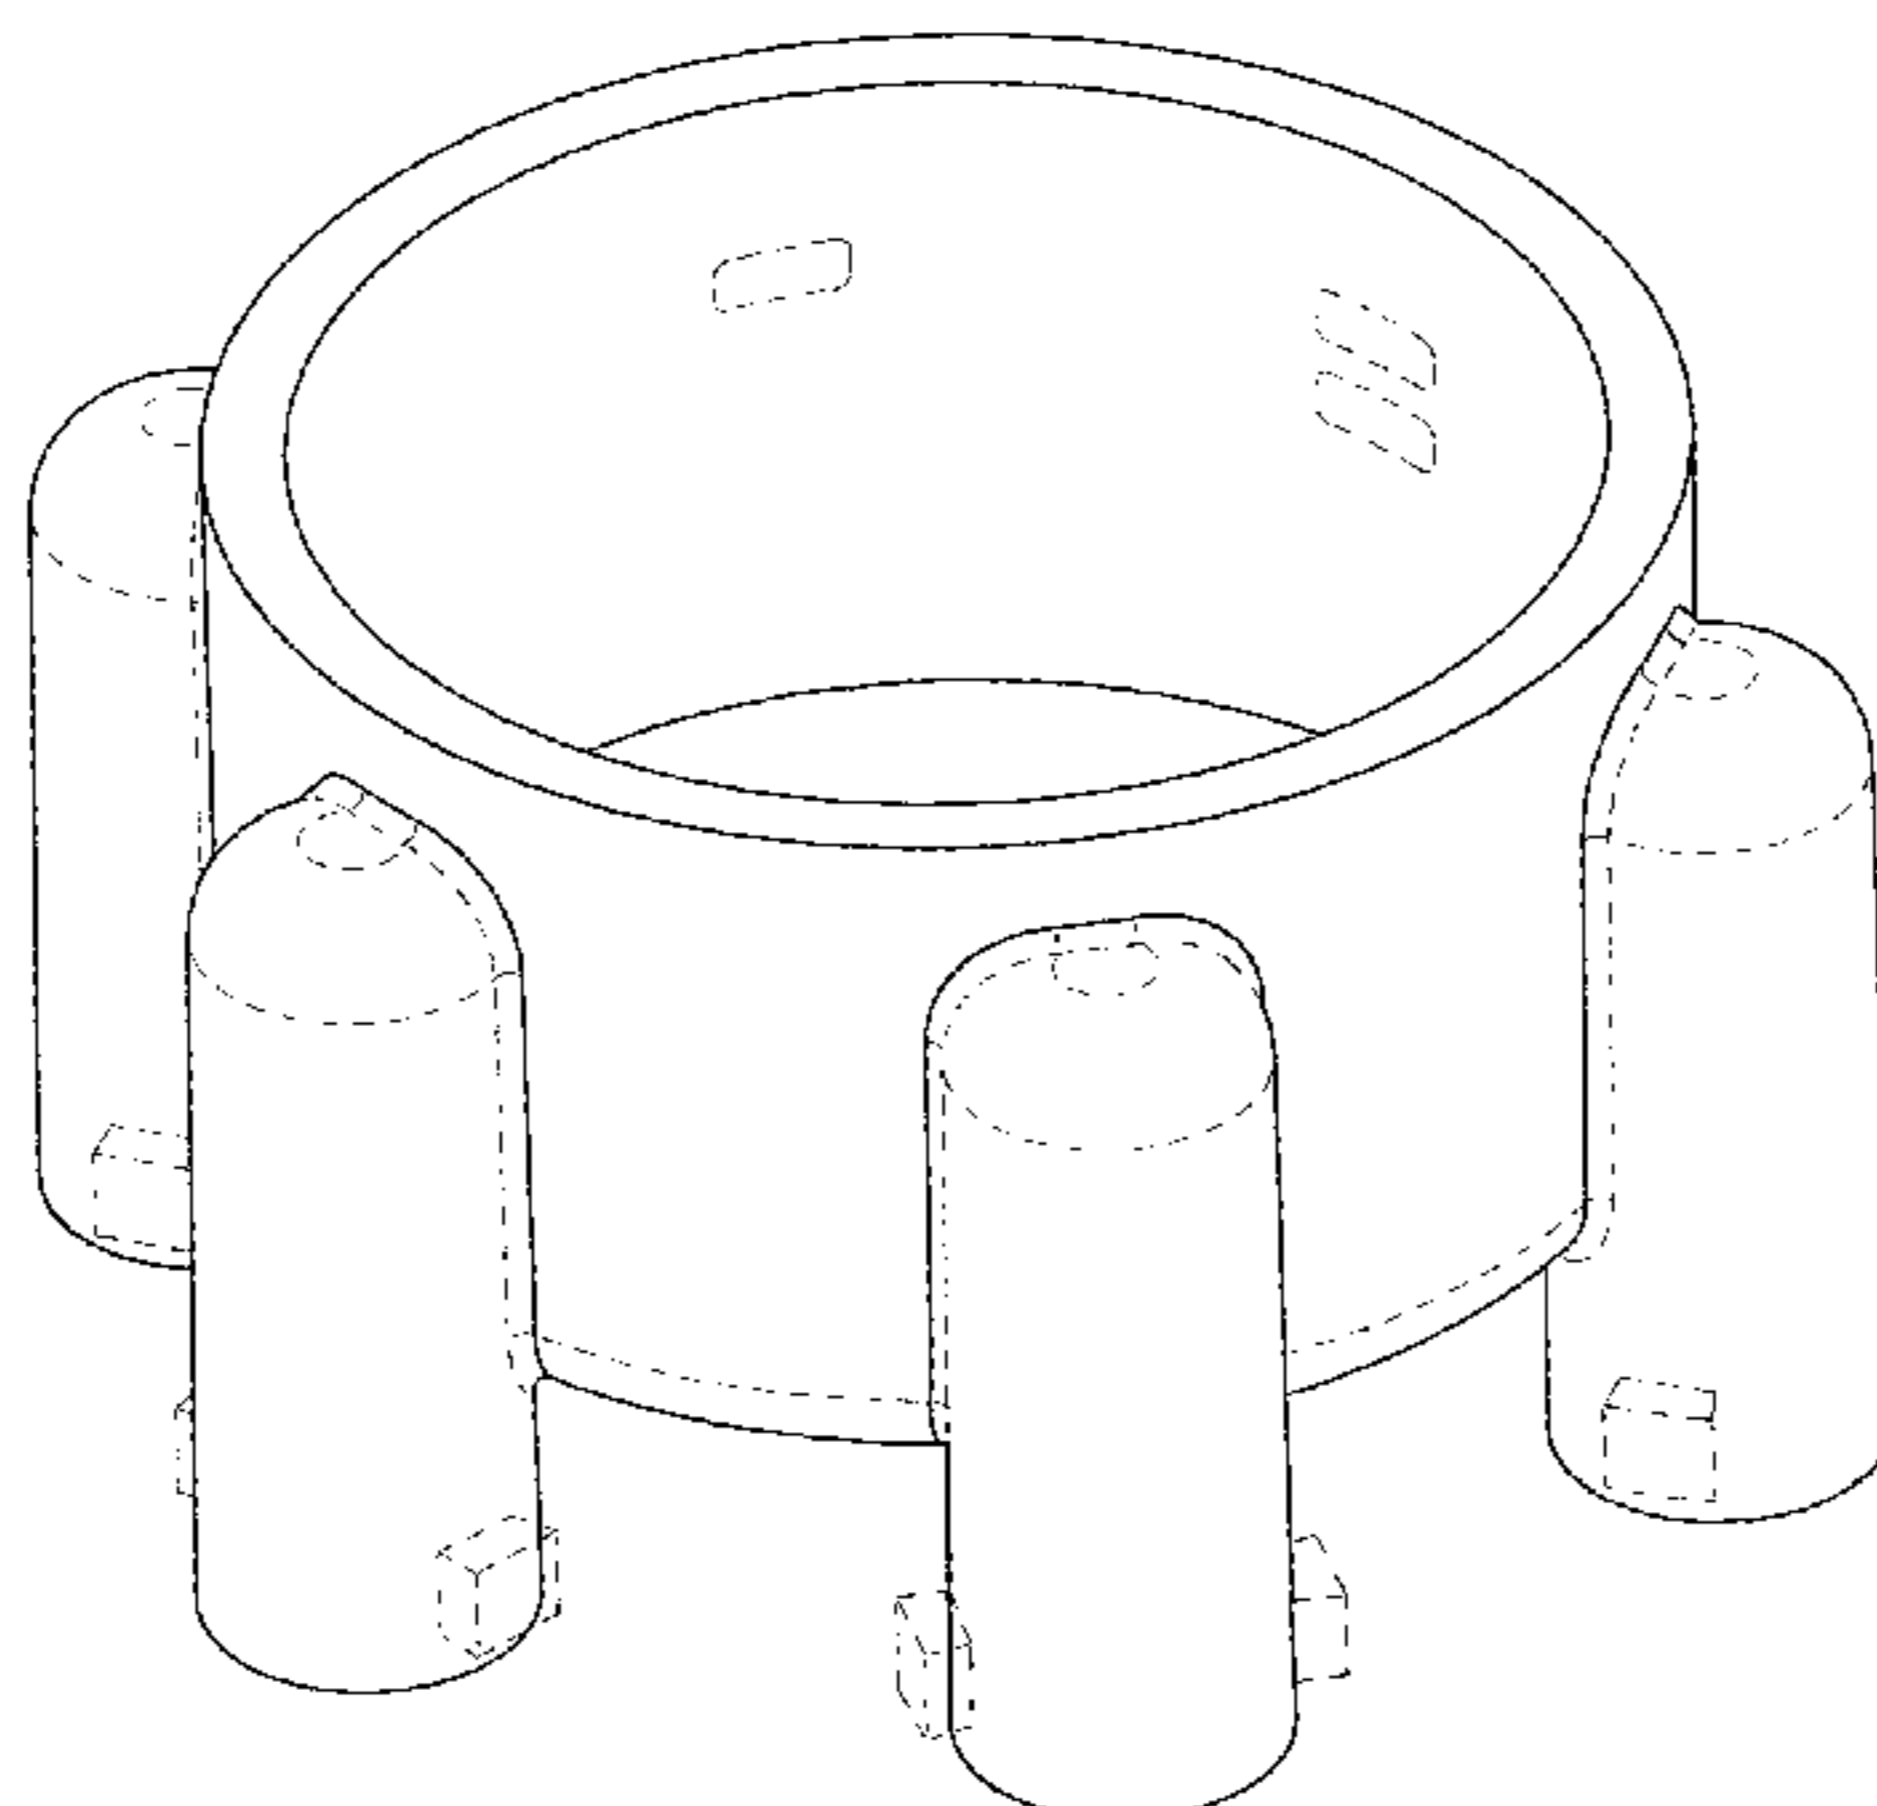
is a top perspective view of the hybrid spray nozzle turret of FIG. 1 along with the rest of the nozzle body including a mount ring above the nozzle body, wherein the ring is mounted to a fluid distribution pipe; and,
